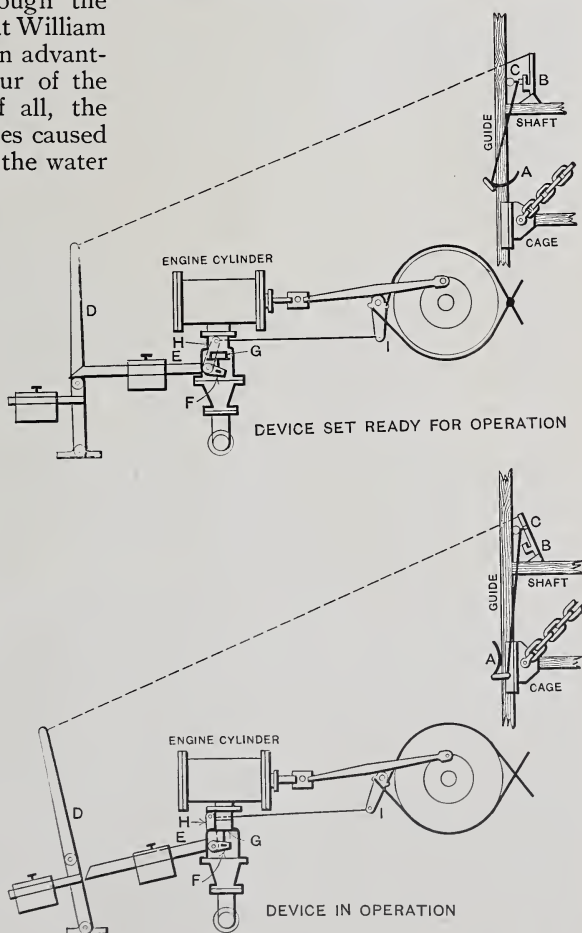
AUTOMATIC OVERWINDING DEVICE FOR HOISTING ENGINES
